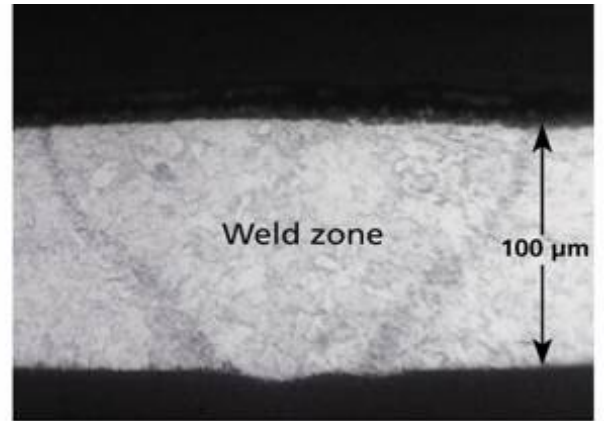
Welding speed 2.5 m/min, 30 Watts
